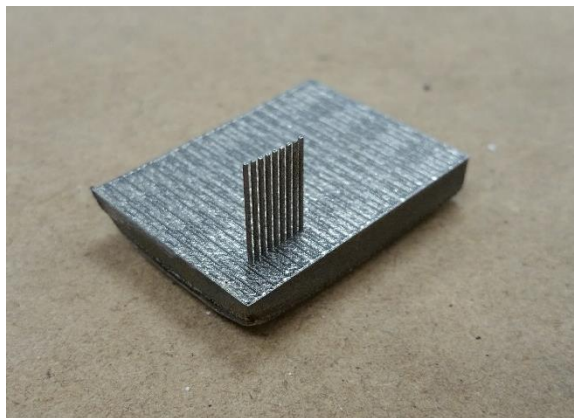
Images of the 9 test beams manufactured by metal 3D printer.
